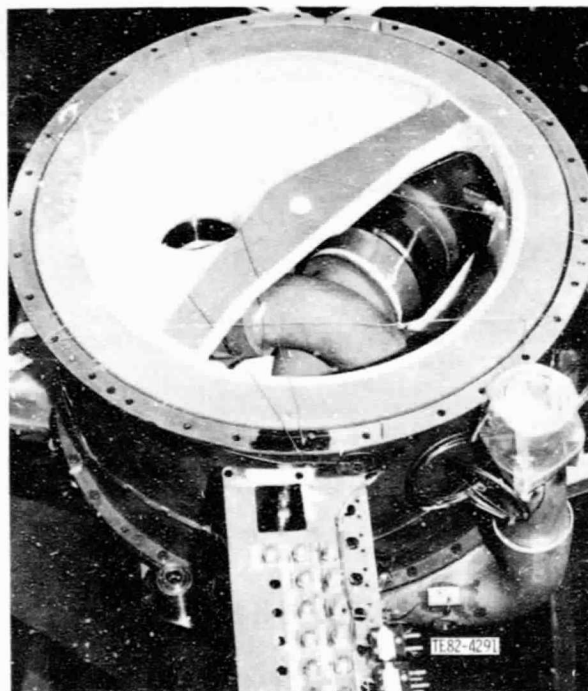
Engine buildup sequence: hot section, showing turbine exhaust duct/regenerator seal platform with combustor and scroll below.
